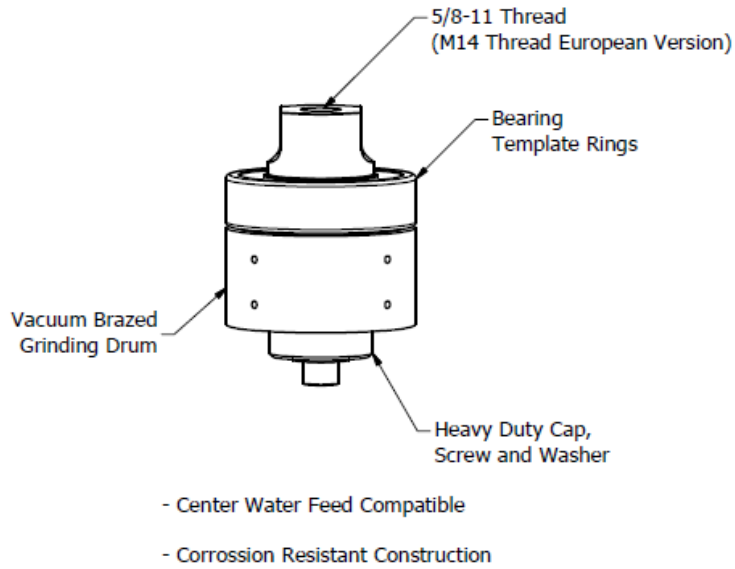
3" Rapid Z™-Drum with Template Bearing (Assembled)
